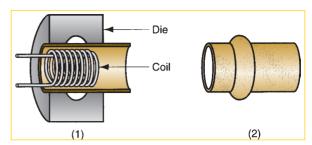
Electromagnetic forming: (1) setup in which coil is inserted into tubular work part surrounded by die; (2) formed part.
